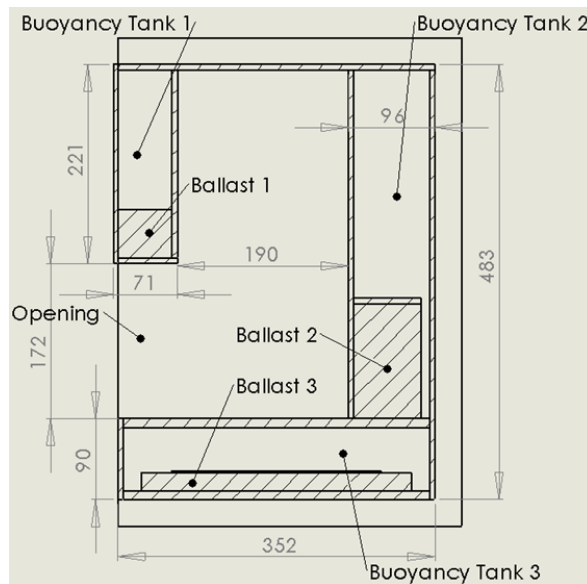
Chamber Cross Section Dimensions and Ballast Locations
